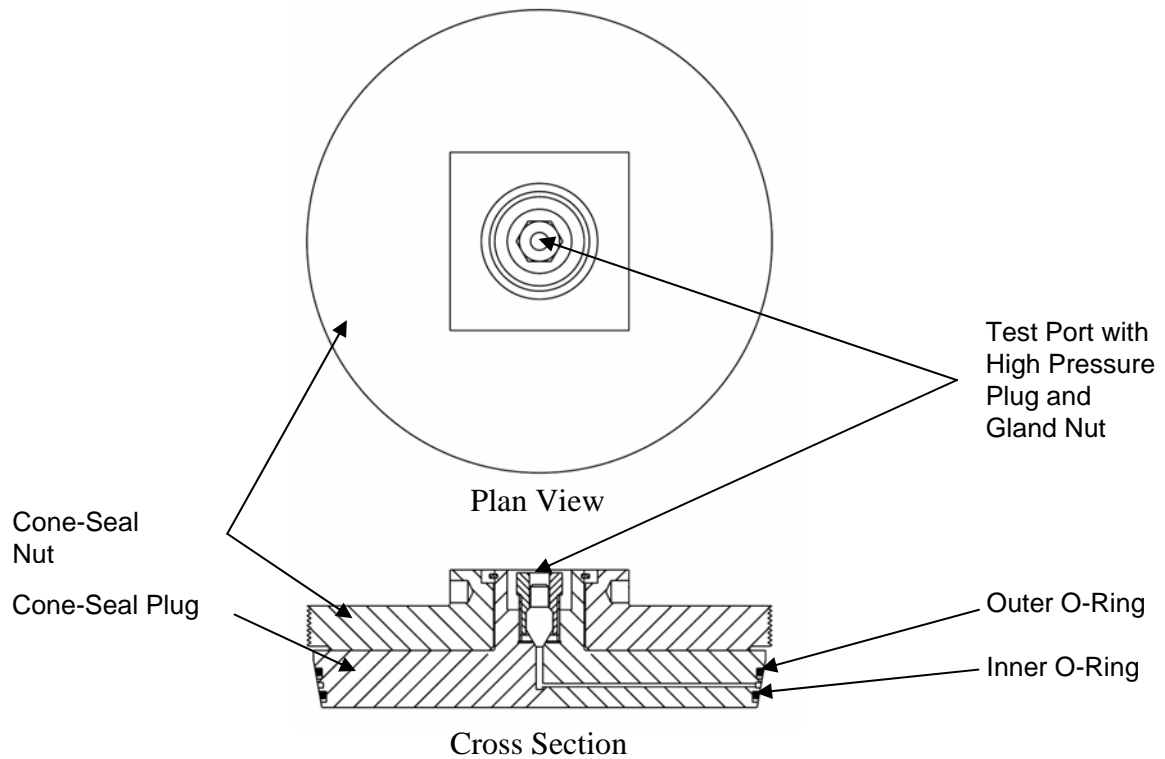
Views of a Typical Cone-Seal Closure Assembly
